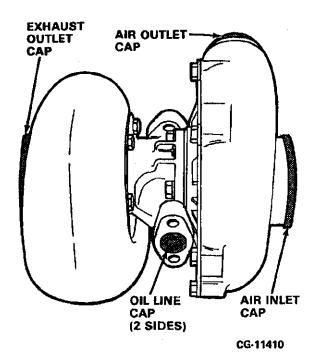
Install Protective Caps on Turbocharger when Removed for Service
